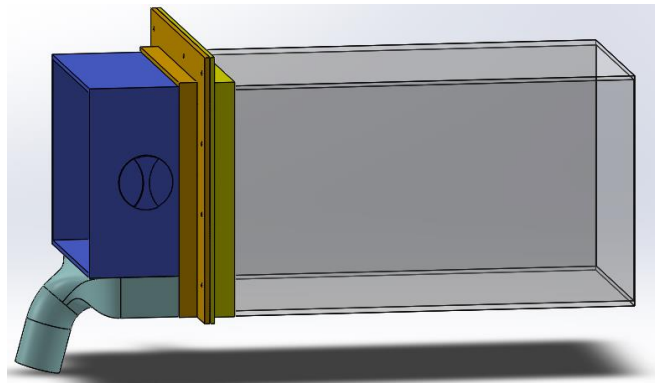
Assembled Blower/ Louvre – Test section flanges.
